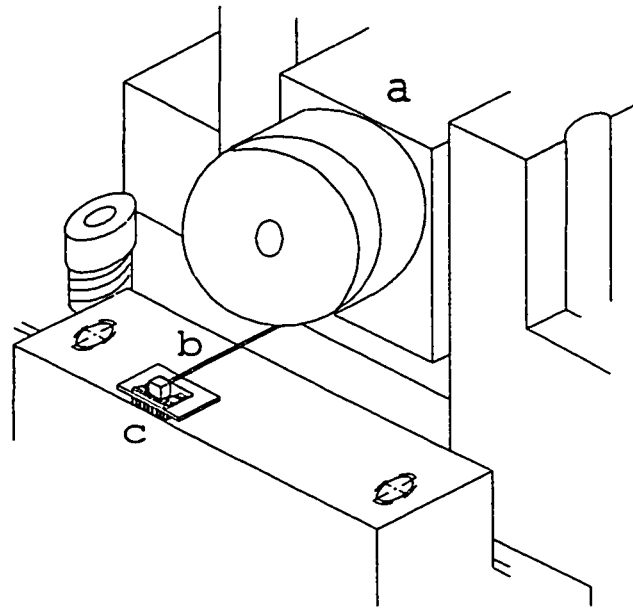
SXC assembly. (a) piezoelectric positioner, (b) No. 80 drill bit which attaches the mirror to the PZT, (c) laser and thermoelectric cooler.
